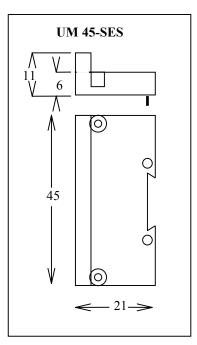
Auxiliary Terminal Board Assembly Drawings
